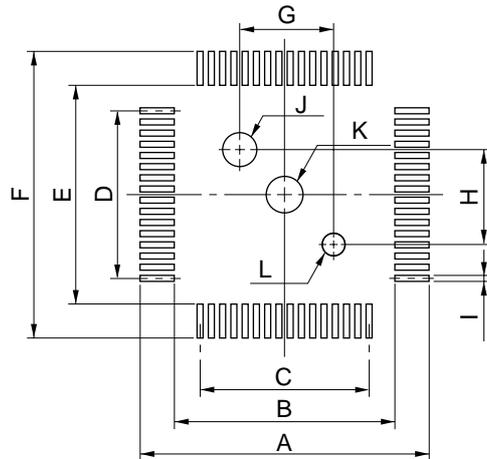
EV-9200GC-64 Package Drawing (for reference only)
